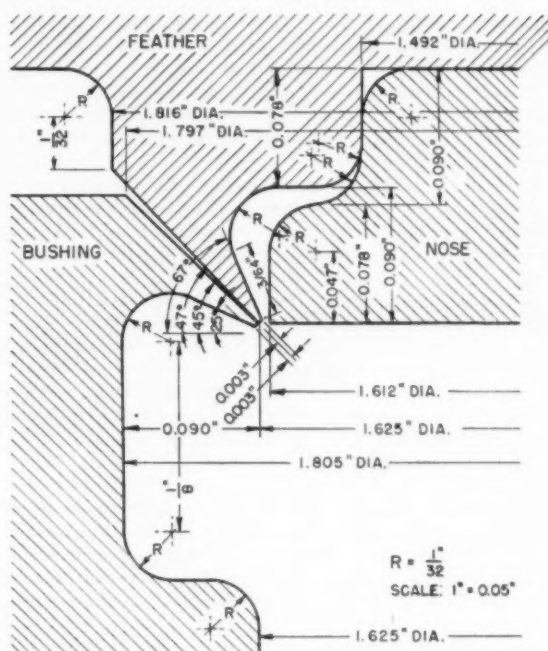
ENLARGED VIEW OF NEW-DESIGN VALVE SEAT
